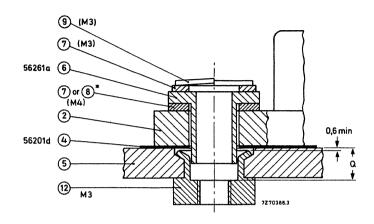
Assembly (partial) for Fig. 10 - insert nuts Q minimum 2,5 mm.
